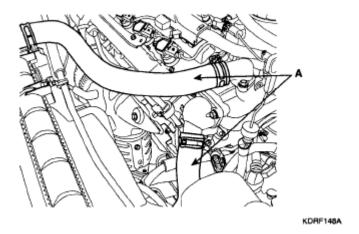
Identifying Intake Air Hose And Air Cleaner Assembly Courtesy of HYUNDAI MOTOR CO.
